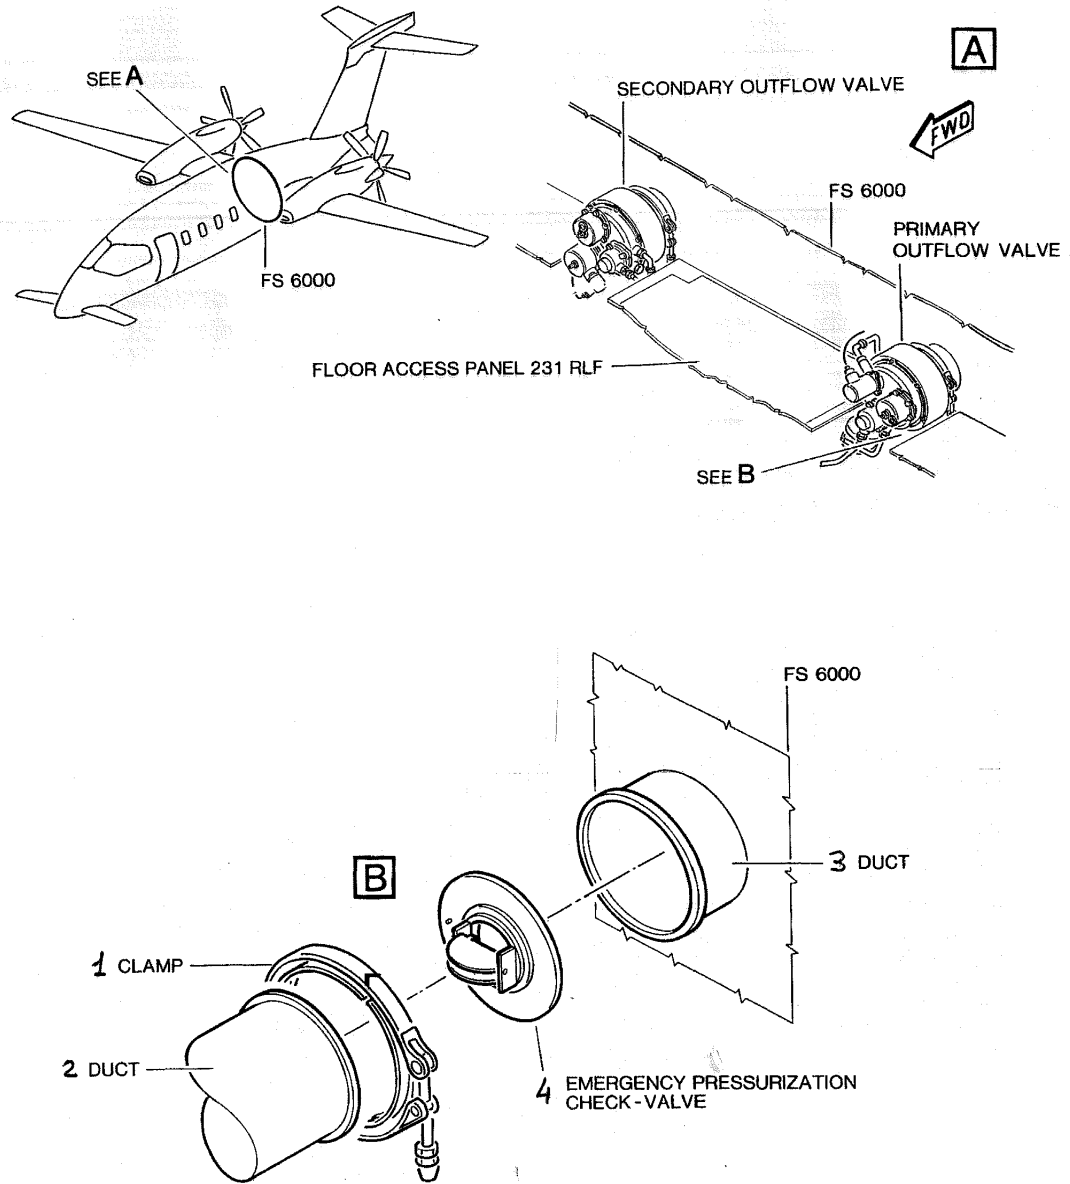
Pressurization Emergency Check Valves - Removal/Installation
